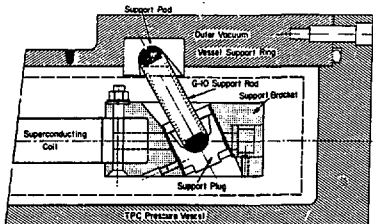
The end of the TPC coil package within the vacuum vessel (at a radial support rod).
